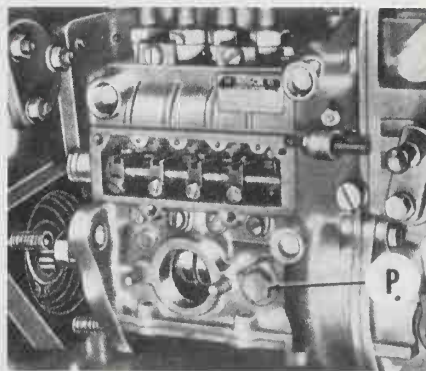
A—View of Bosch injection pump used on Models 834 and L54 showing location of drain plug (P).
